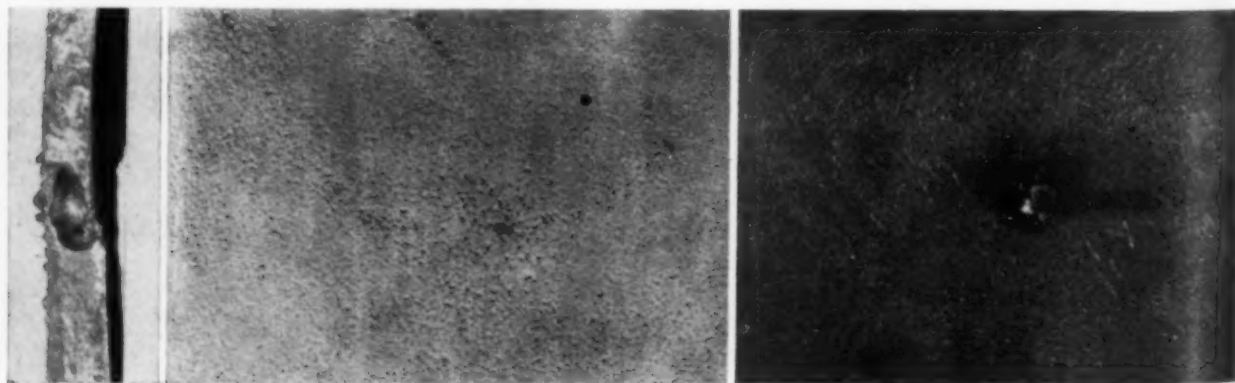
(Left) — Fracture Showing Blow in a Thin Casting. Note smooth rounded surfaces inside the cavity. Fig. 9 (Center) — Rough Spots on the Surface of Casting, Indicating
